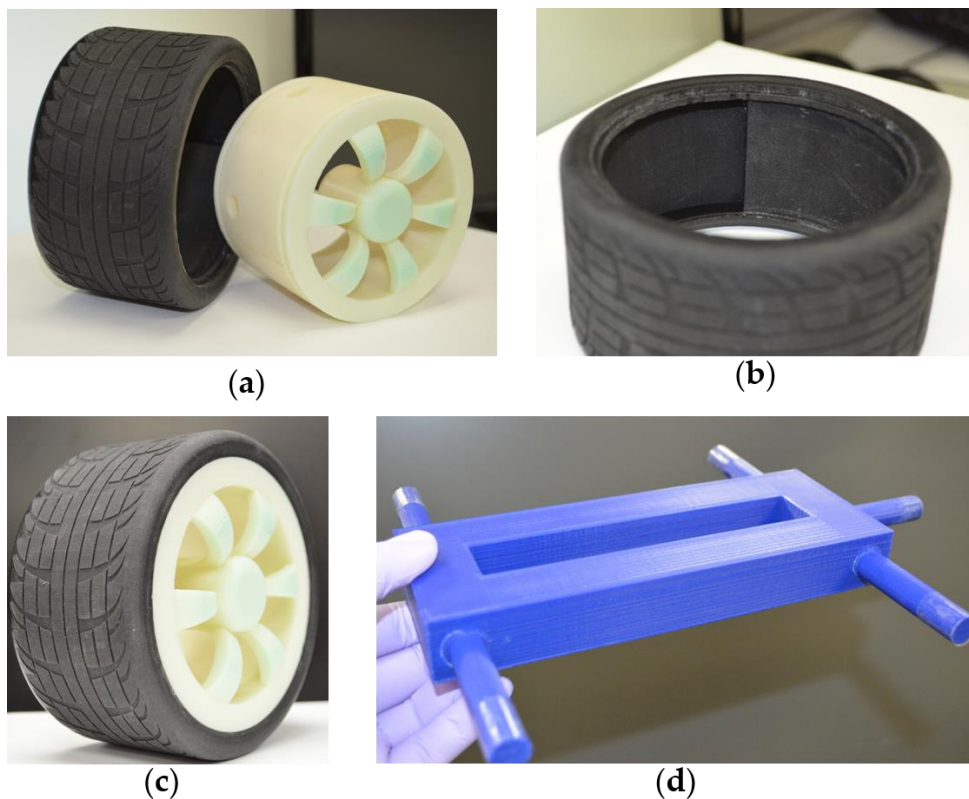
3D printed tire assembly: (a) 3D printed tire and wheel; (b) slot for sensor inside tire; (c) assembled tire on wheel; (d) 3D printed chassis [68].
